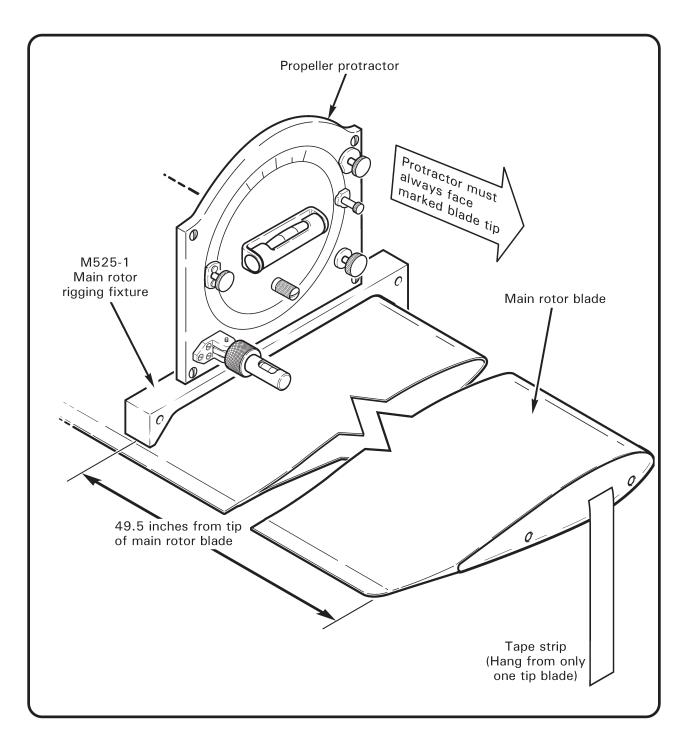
PLACEMENT OF PROTRACTOR
